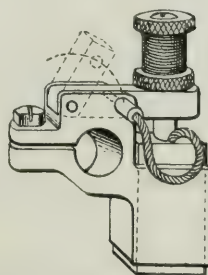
THE "PARKIR" BRUSH HOLDER.
